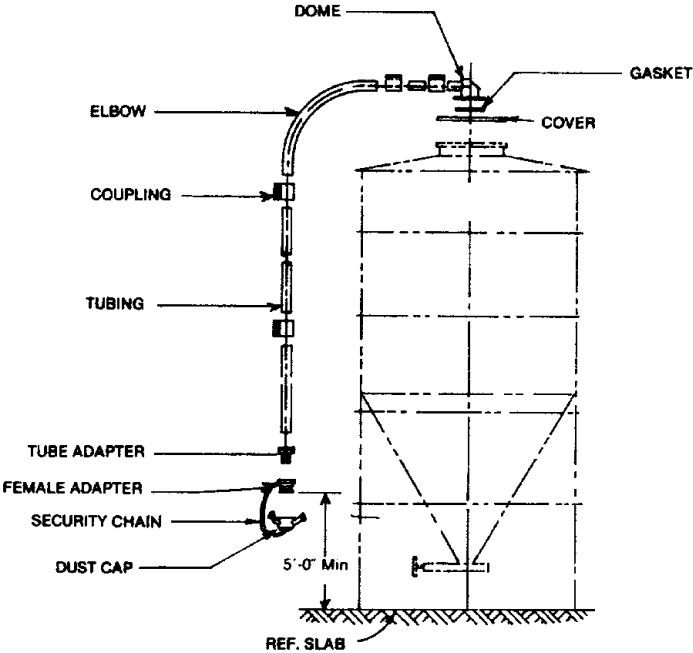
Load line assembly. *Courtesy of Premier Pneumatics, Inc., Salina, KS, USA.
